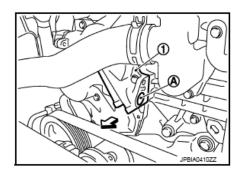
Identifying Intake Valve Timing Control Cover And Solenoid Valve Hole Courtesy of NISSAN MOTOR CO., U.S.A.
